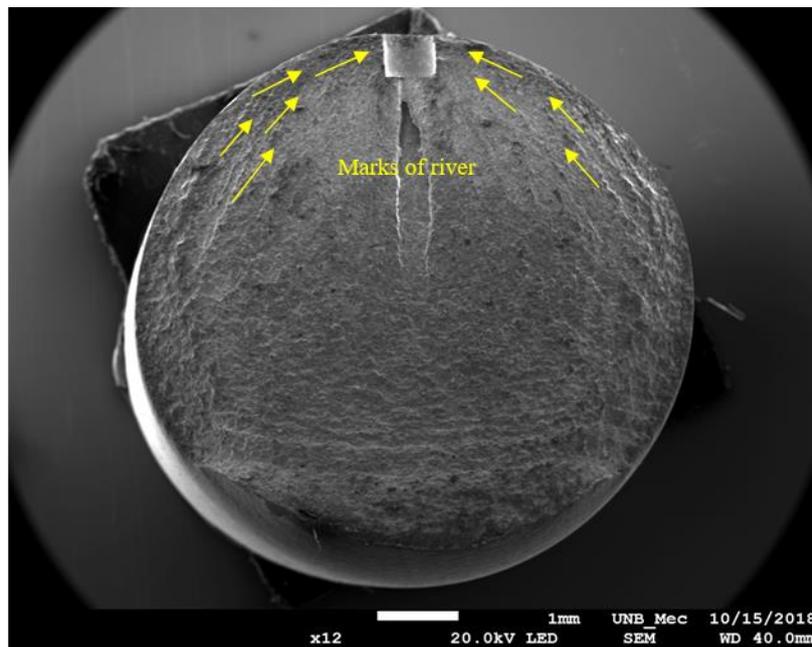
a) Marks of river of specimens with defects \varnothing 0.75 mm. MEV. 12x.
